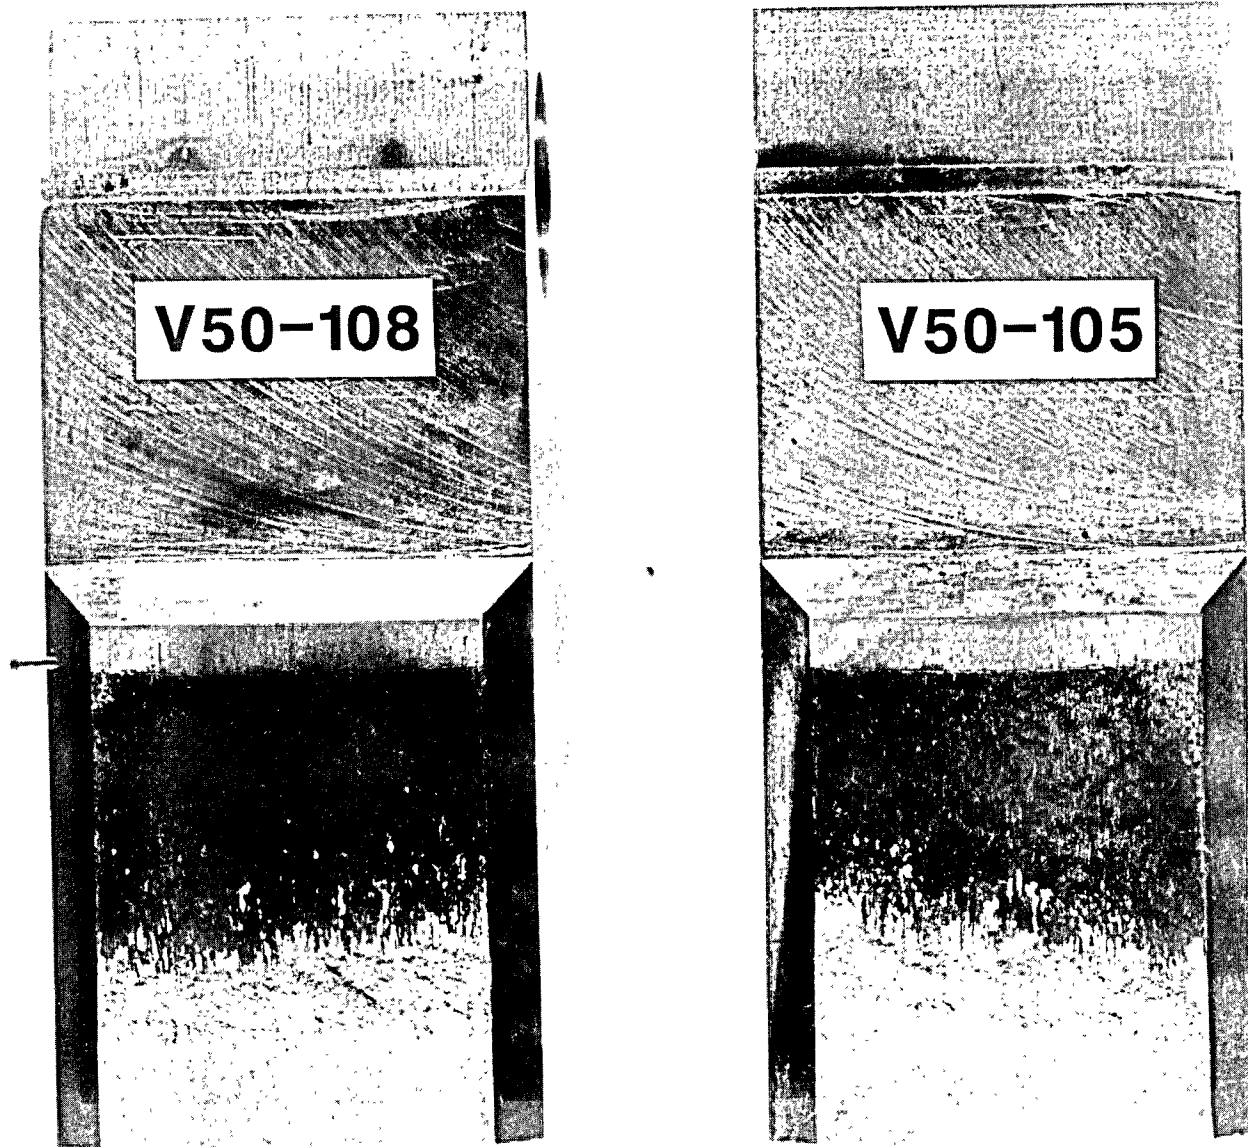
Fracture surfaces of the 2T-CT specimens.
